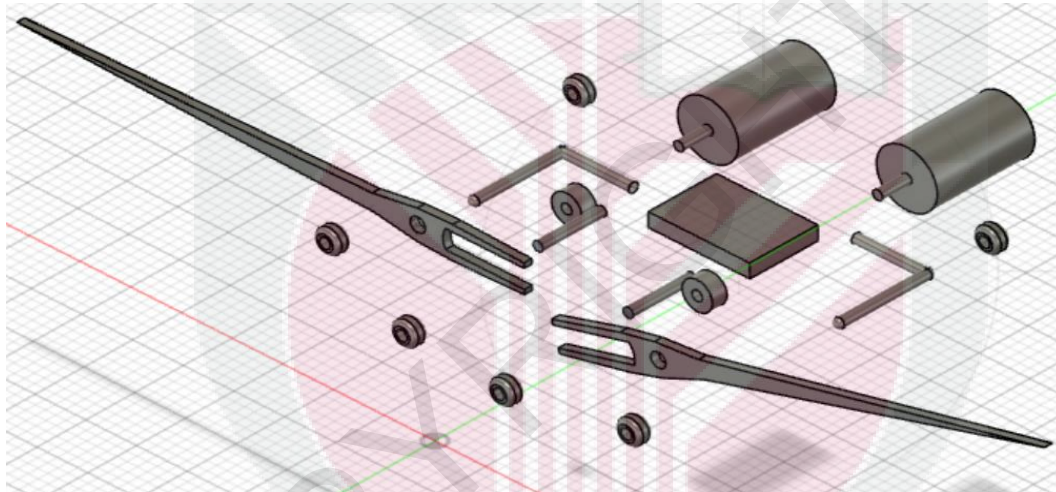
Exploded View of the Proposed DC-SDL Design
